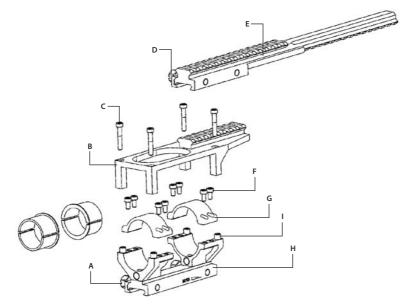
OPTIONAL FSRS SYSTEM. COMPONENT PARTS
